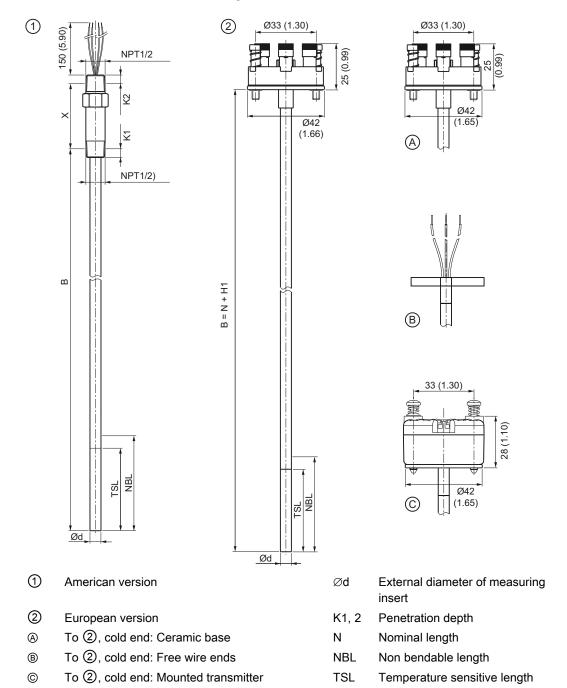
Dimensional drawings SITRANS TSinsert - measuring inserts for SITRANS TS500 - dimensions in mm (inch)
